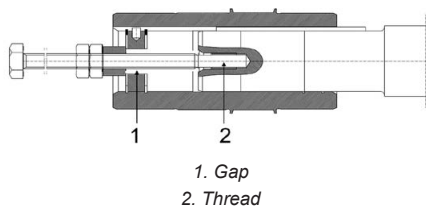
Installing a shaft-mounted gearbox onto the driven shaft with a key
